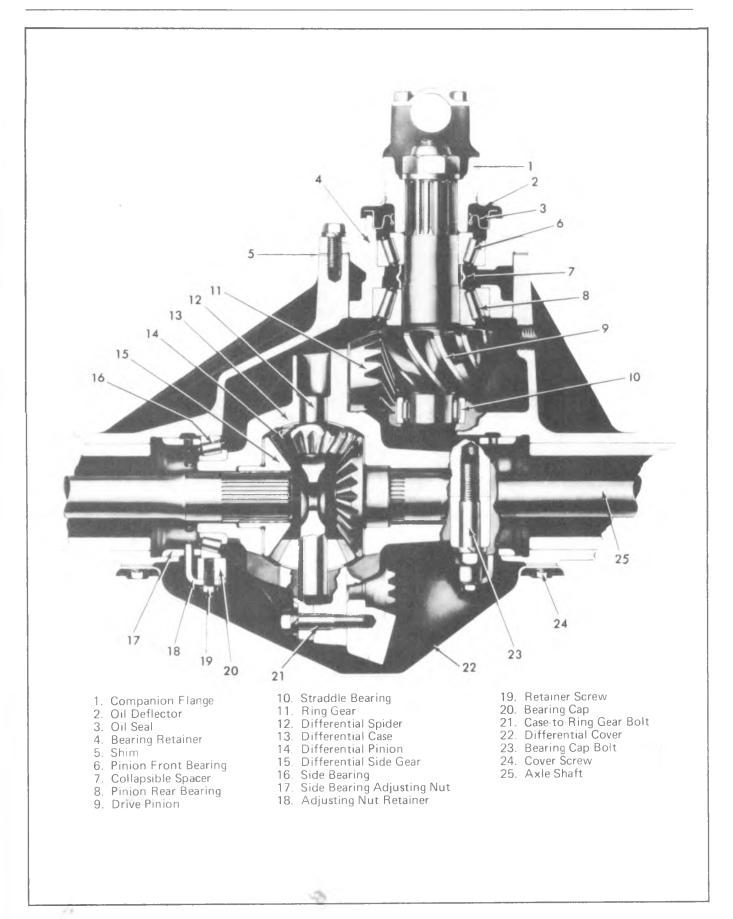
B-5--Chevrolet 10-1/2" Ring Gear Axle Cross-Section
